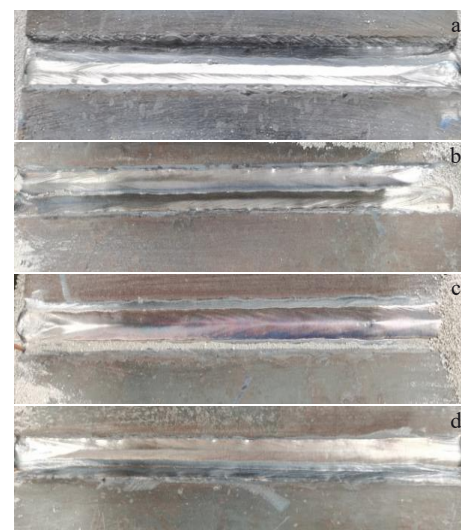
Macroscopic morphologies of deposited metal weld bead: (a) specimen 1; (2) specimen 2; (3) specimen 3; (4) specimen 4
